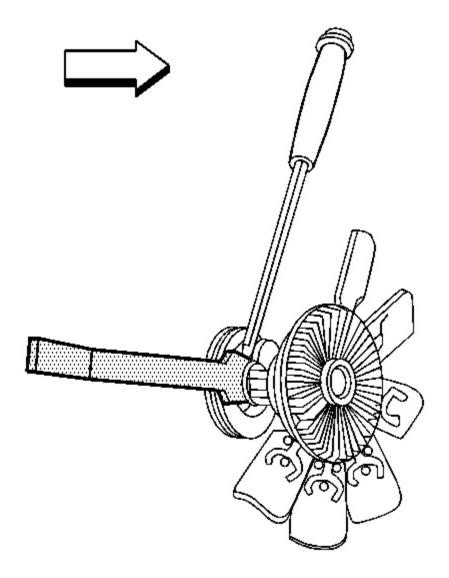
Installing J 46406 To Fan Clutch Courtesy of GENERAL MOTORS CORP.
